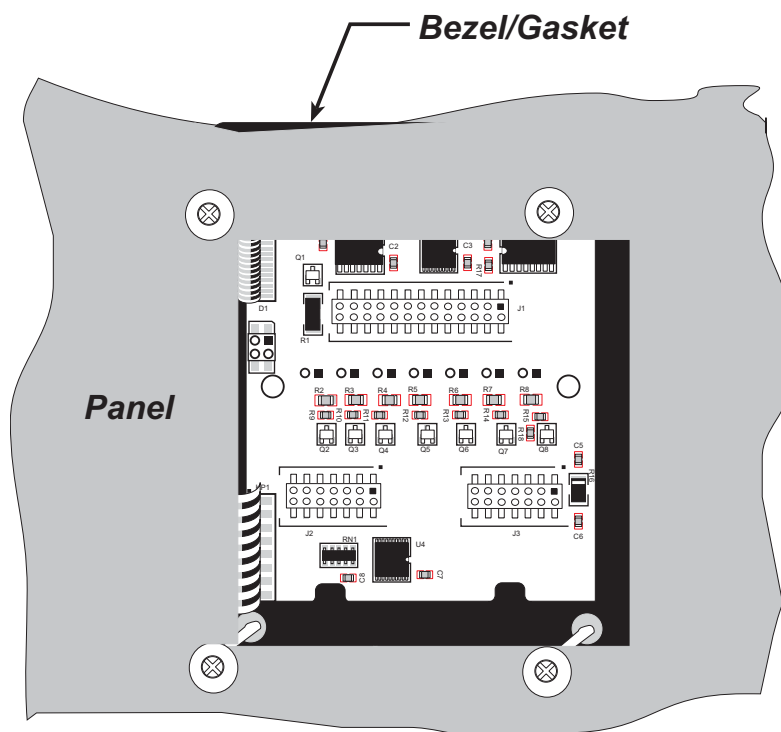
LCD/Keypad Module Mounted in Panel (rear view)
